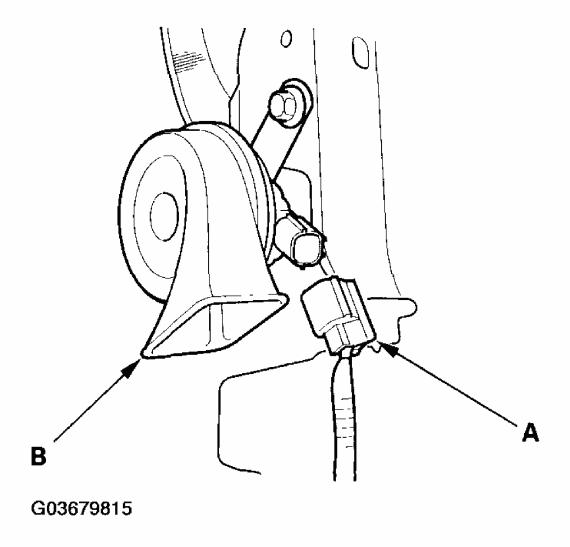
Disconnecting Connector To Remove Horn Courtesy of AMERICAN HONDA MOTOR CO., INC.
